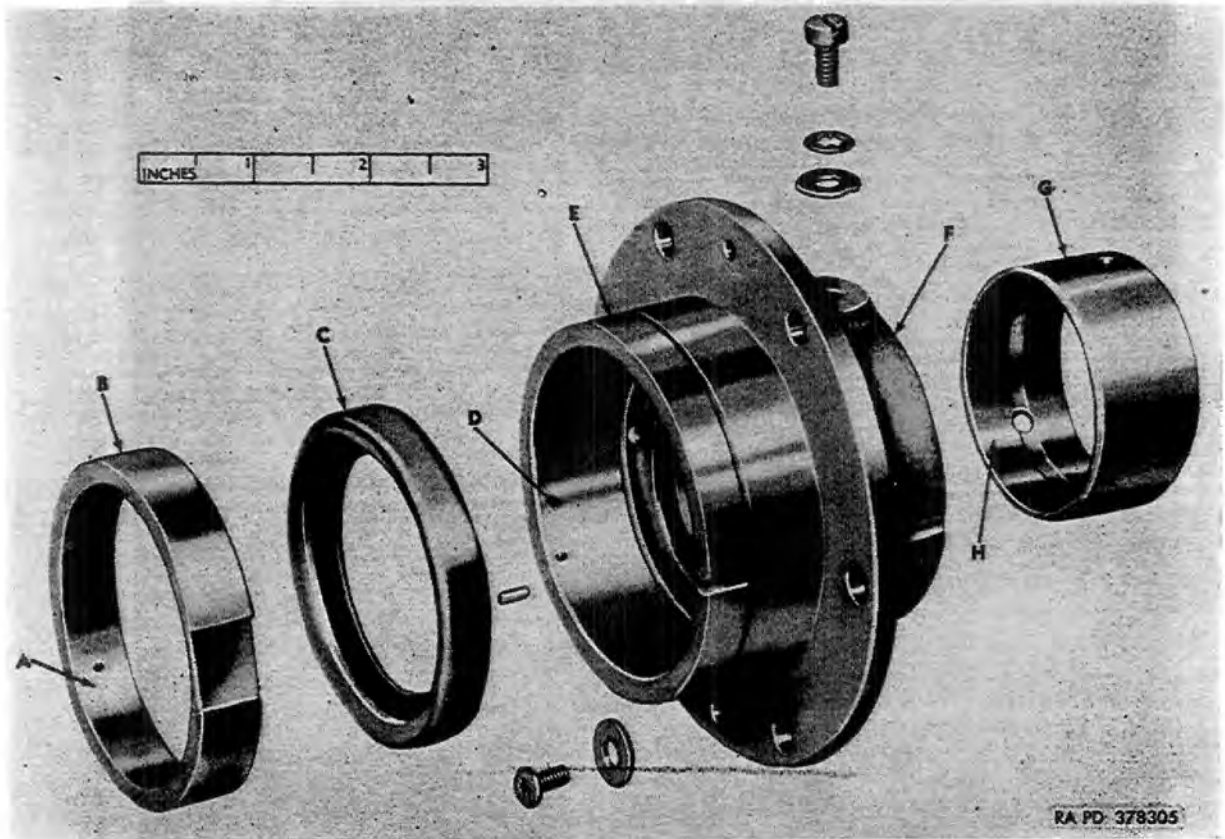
Repair and rebuild standard points of measurement for crankshaft adapter.
